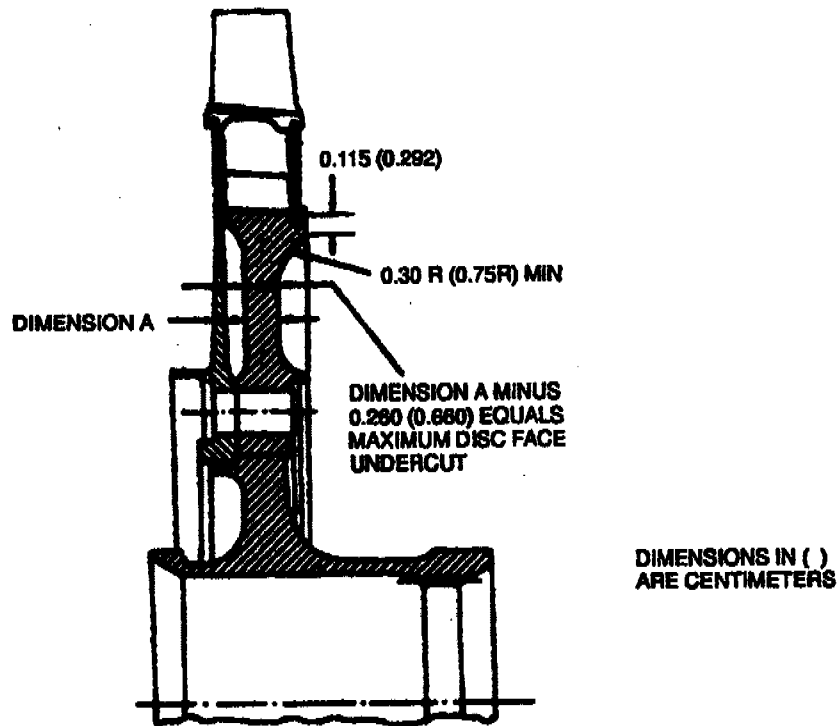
First Stage Gas Producer Rotor Assembly Disc - Grinding Area.
